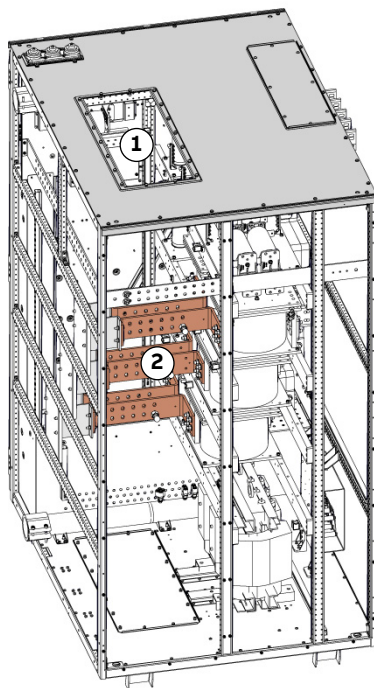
PCU 6-pulse top and bottom cable entry (back view)
